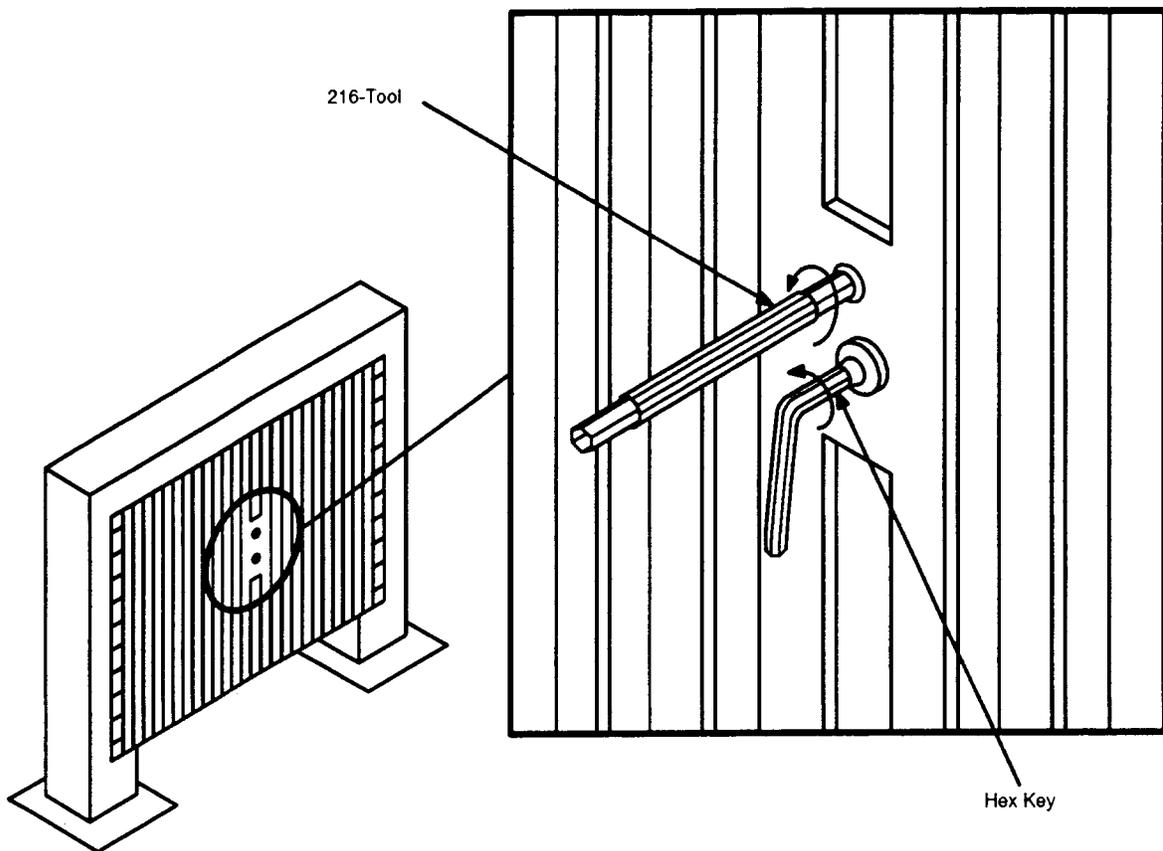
Opening a Typical Cabinet with Hex Key and 216-Tool
